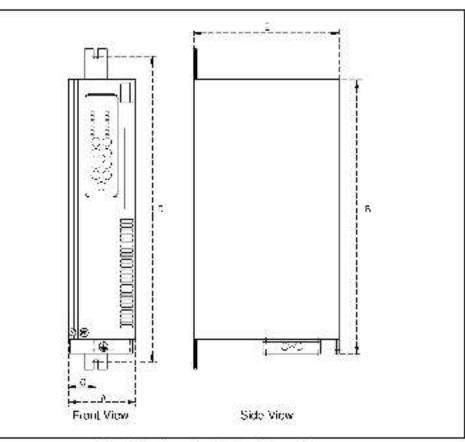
Dimensions for 2 to 30 Amp Drives
